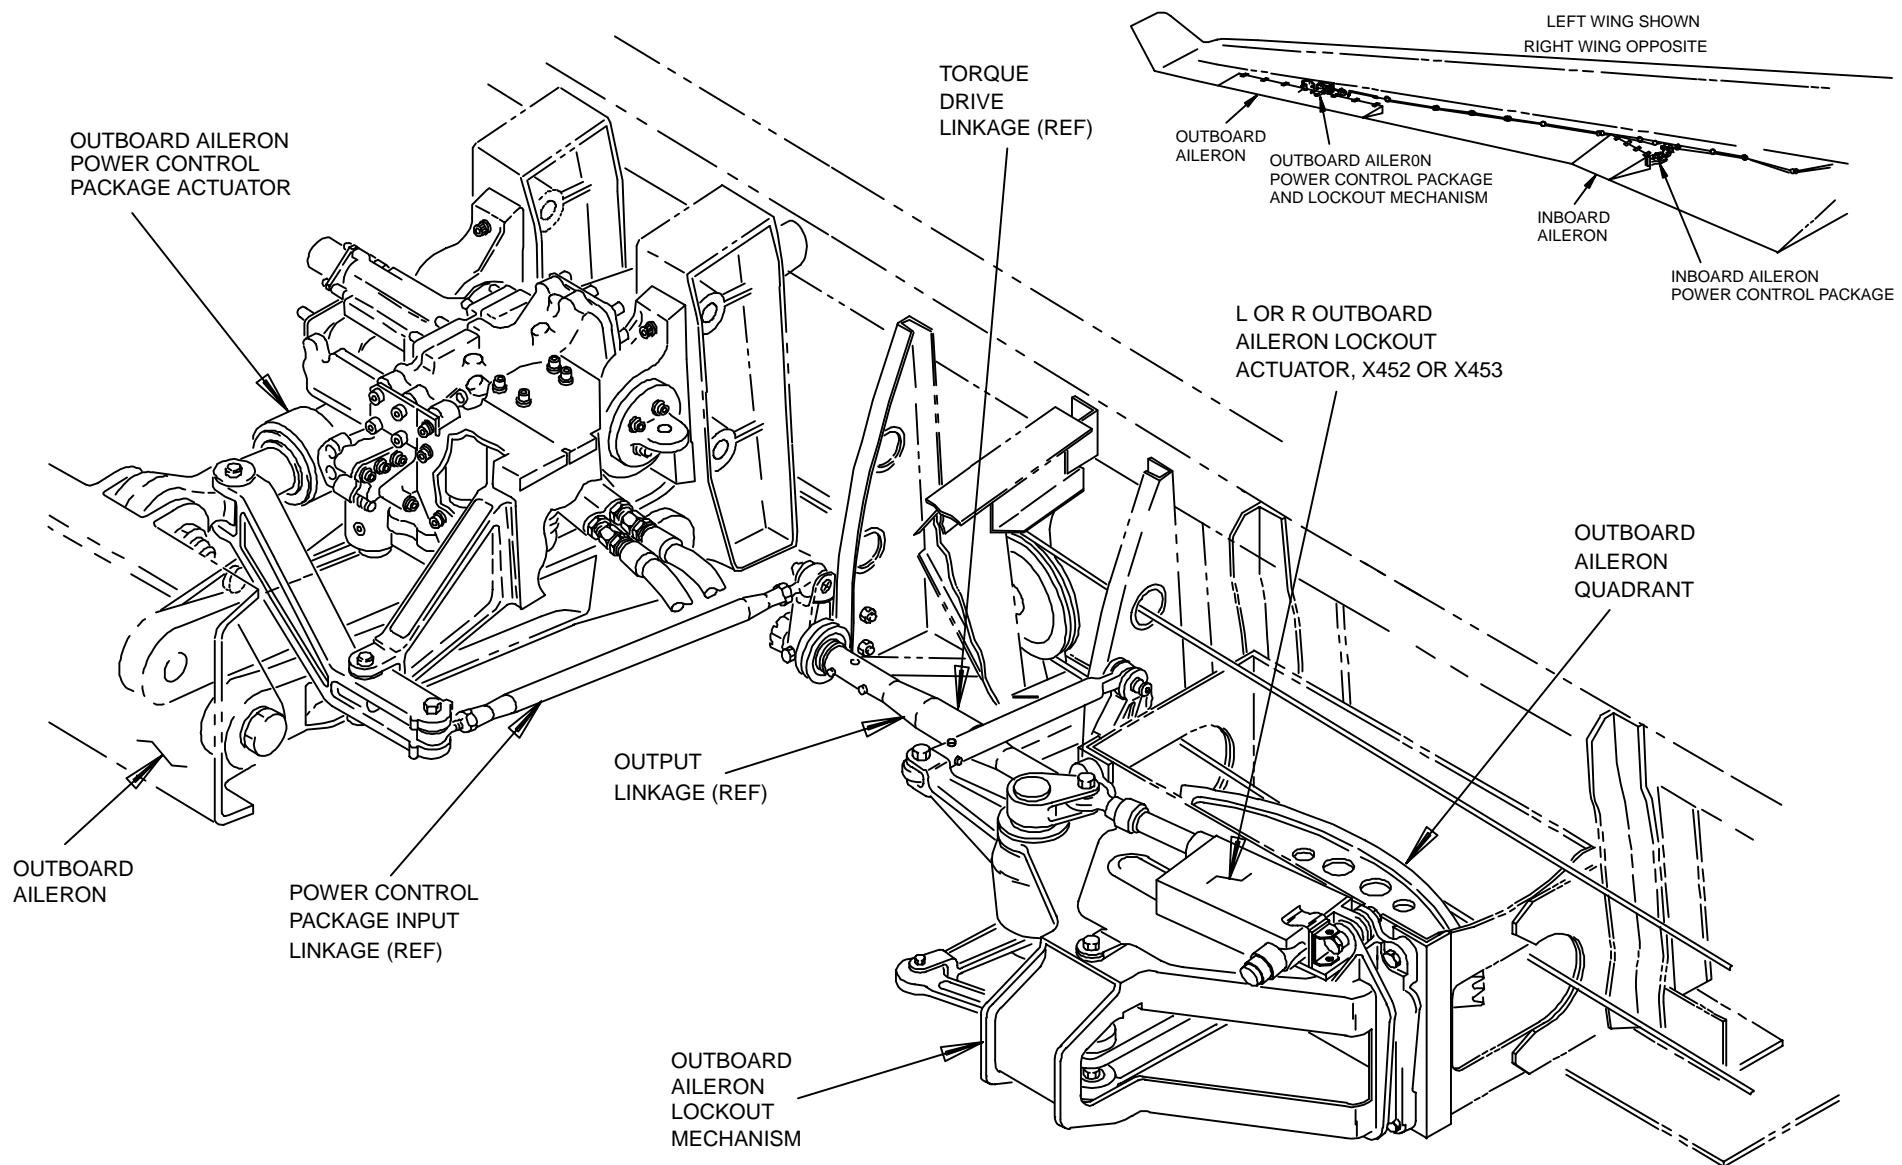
OUTBOARD AILERON CONTROL PACKAGE AND LOCKOUT MECHANISM
